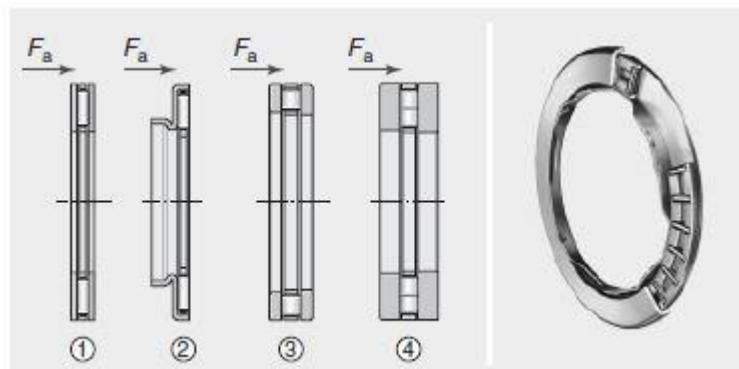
Different design variants of axial needle roller bearings and cylindrical roller thrust bearings (D. Crolla et al., 2014)
